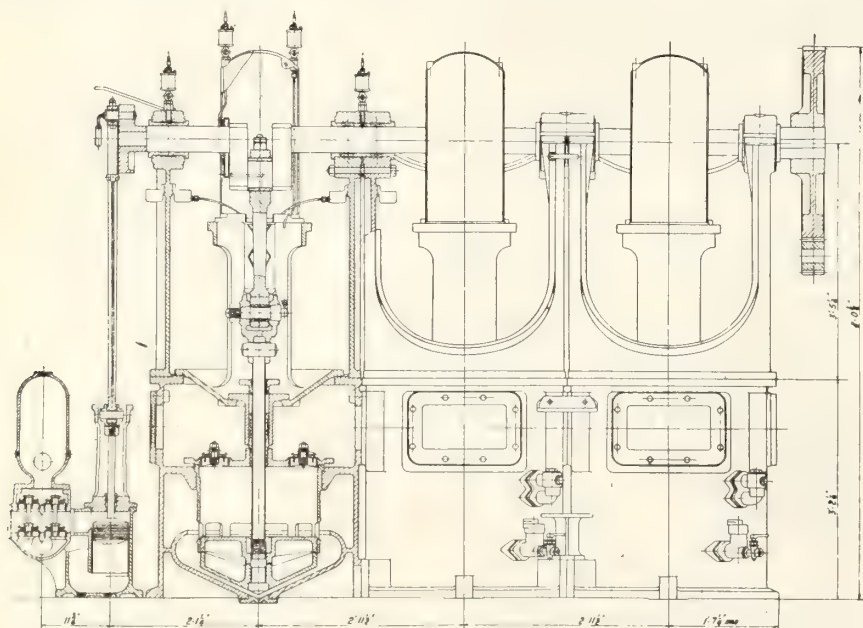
SURFACE CONDENSING EQUIPMENT SHOWING SECTION THROUGH "EDWARDS" AIR PUMP.
